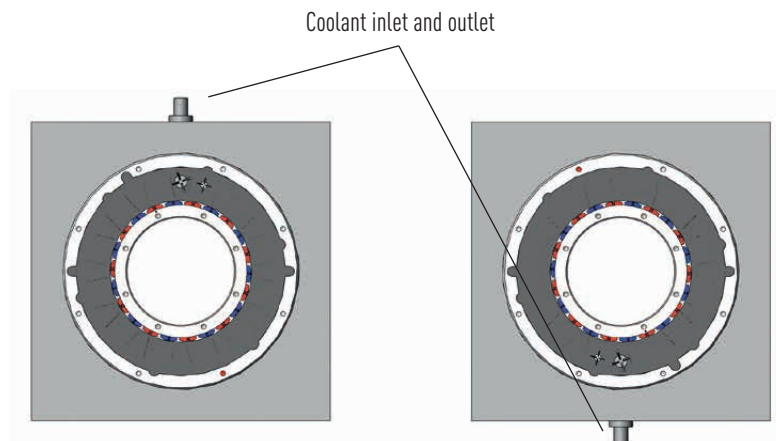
Coolant inlet and outlet in vertical mounting position
